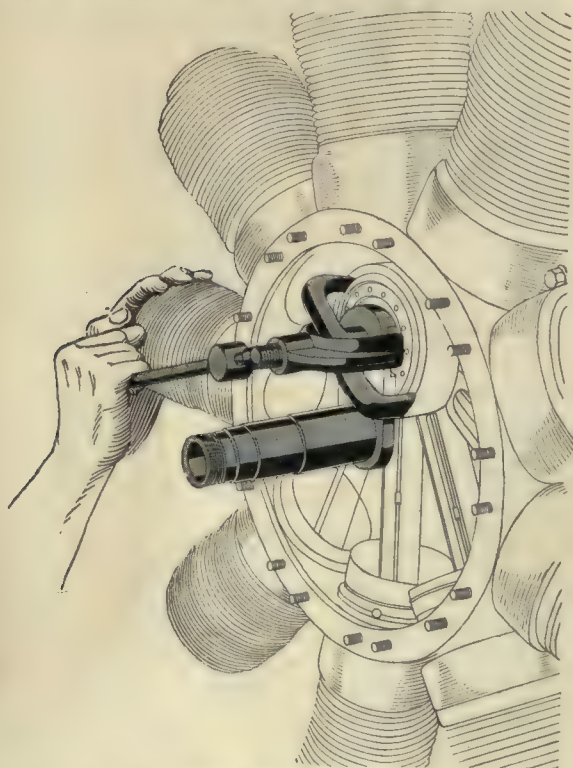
DRAWING OFF THE SHORT END OF THE CRANKSHAFT
